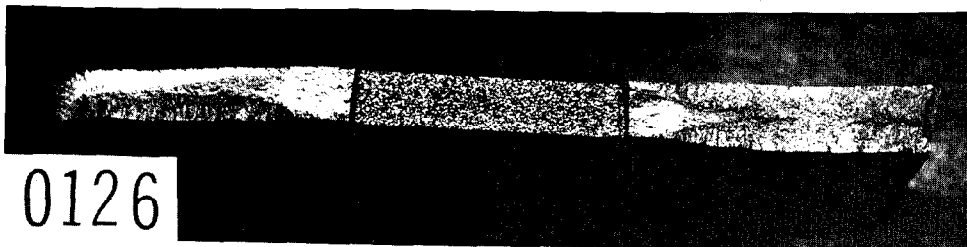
WR fracture surface in a Ti-2-1/2Al-16V alloy center-cracked crack toughness specimen. 5X.
